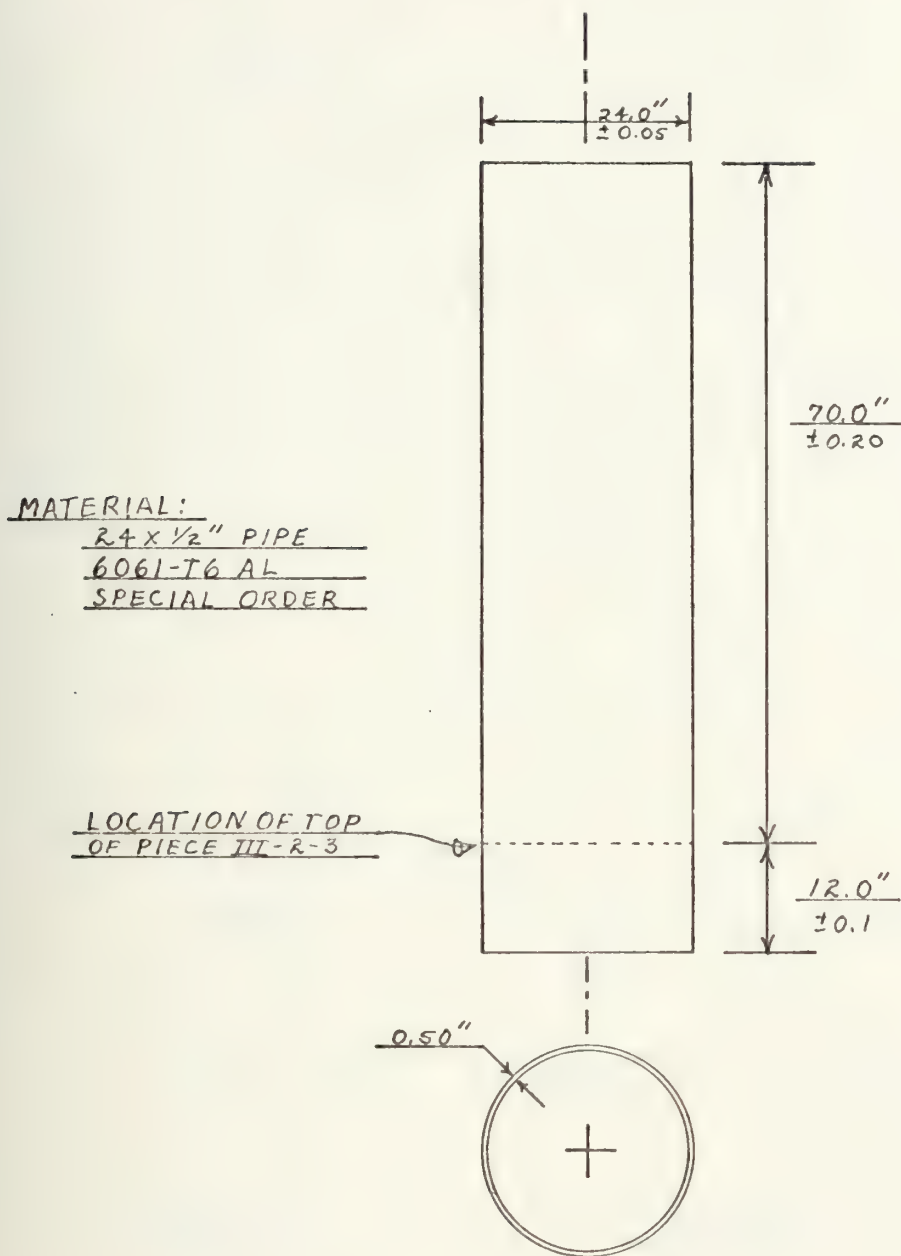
PIECE III-2-2, BALLAST TANK CYLINDER
